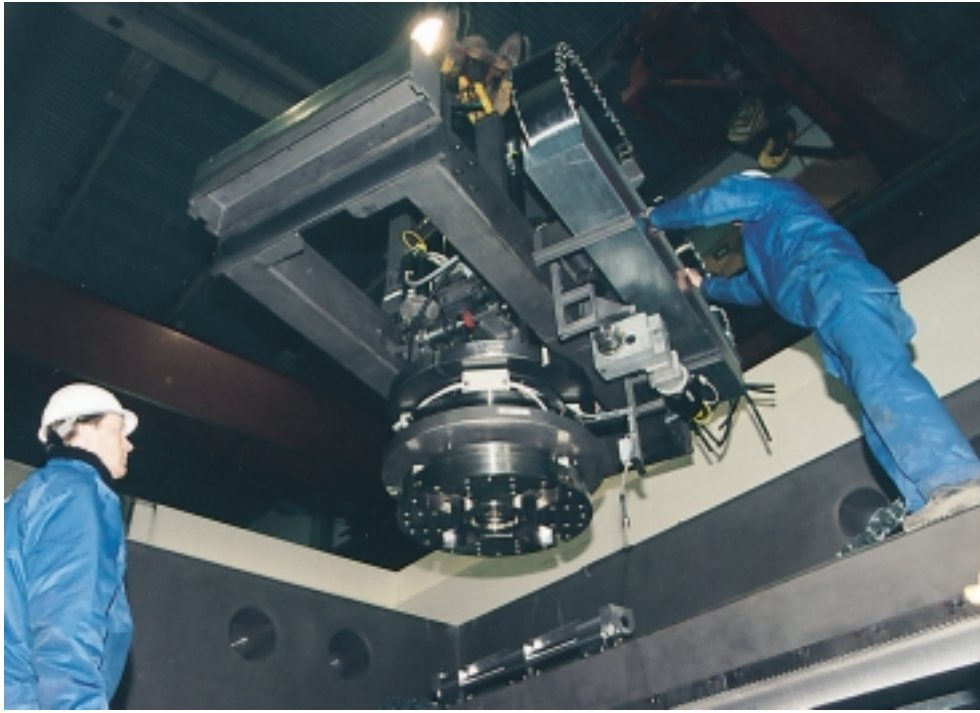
Installation of equipment in the Canister Laboratory's welding station.
